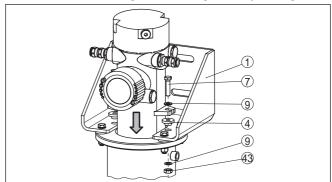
Mounting the sensor - SOLITRAC, POINTRAC
